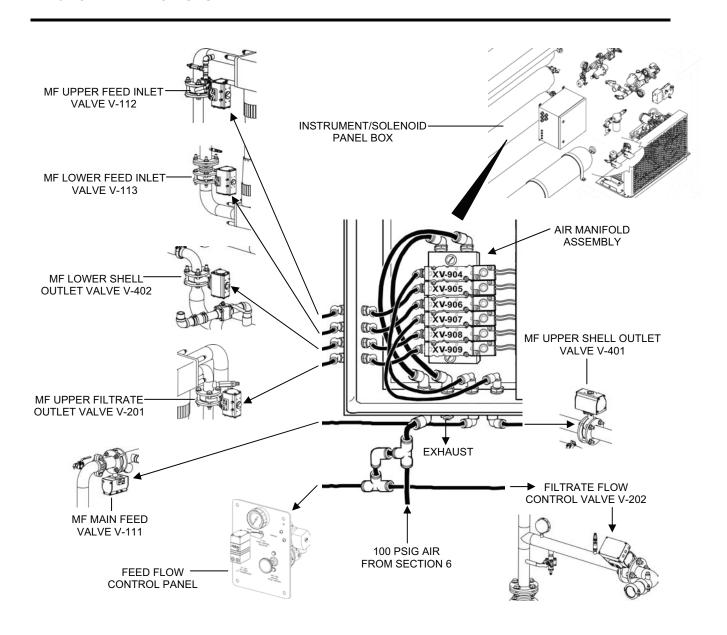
Air Manifold Assembly Air Tube Connection Arrangement.
